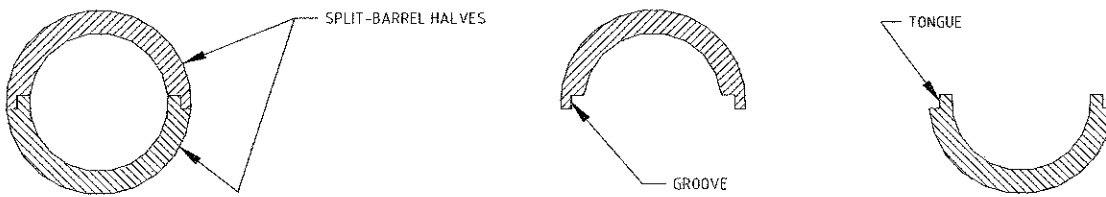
Cross-Sectional View of Split-Barrel Sampler Assembly
